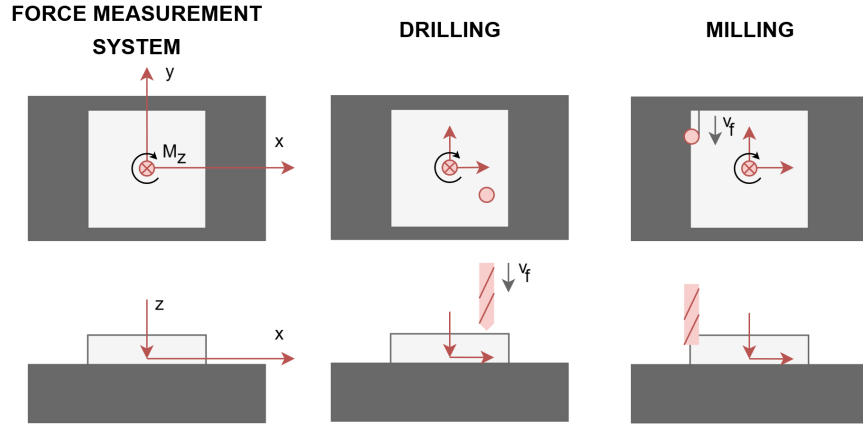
Force measurement system to measure the forces occurring on the workpiece during machining.
